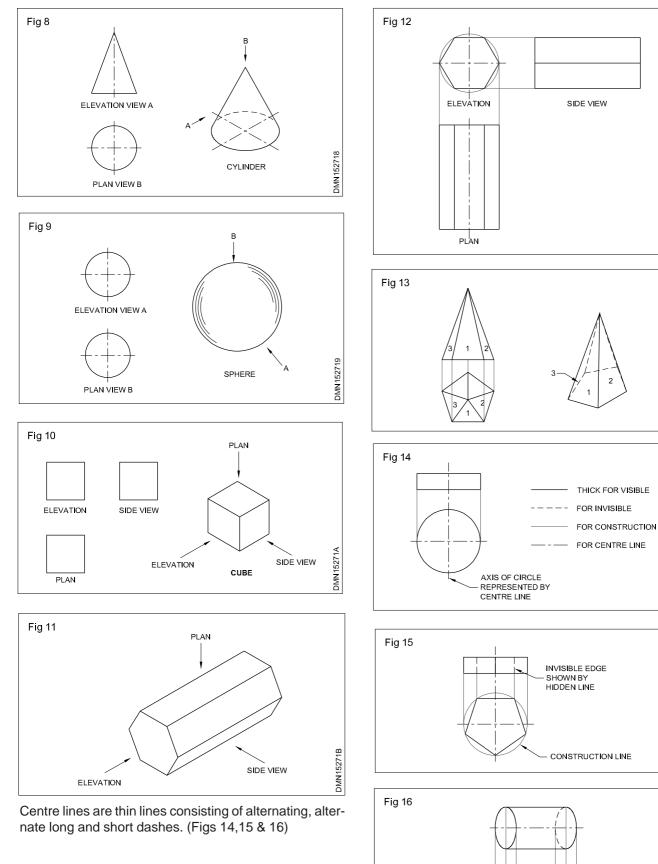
,8,9,10,11,12 & 13 indicate the plan, elevation and end view of some solids for the position defined against each.
